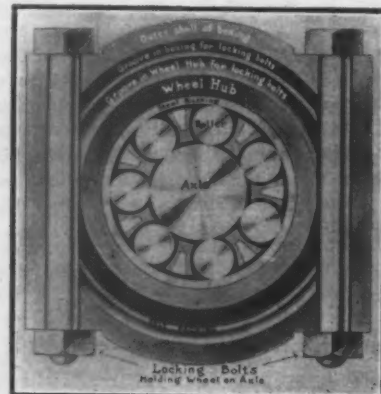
Cross Section of the Whitney Roller Bearing.
